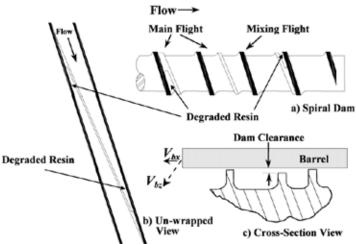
Schematic of a spiral dam¹²: a) side view, b) un-wrapped view, and c) a cross-sectional view perpendicular to the flight edge showing the clearance between the dam and the barrel wall. Degraded resin was observed at the pushing side of the channel just downstream of the entry to the spiral dam and at the trailing side of the channel just upstream of the exit to the spiral dam.
